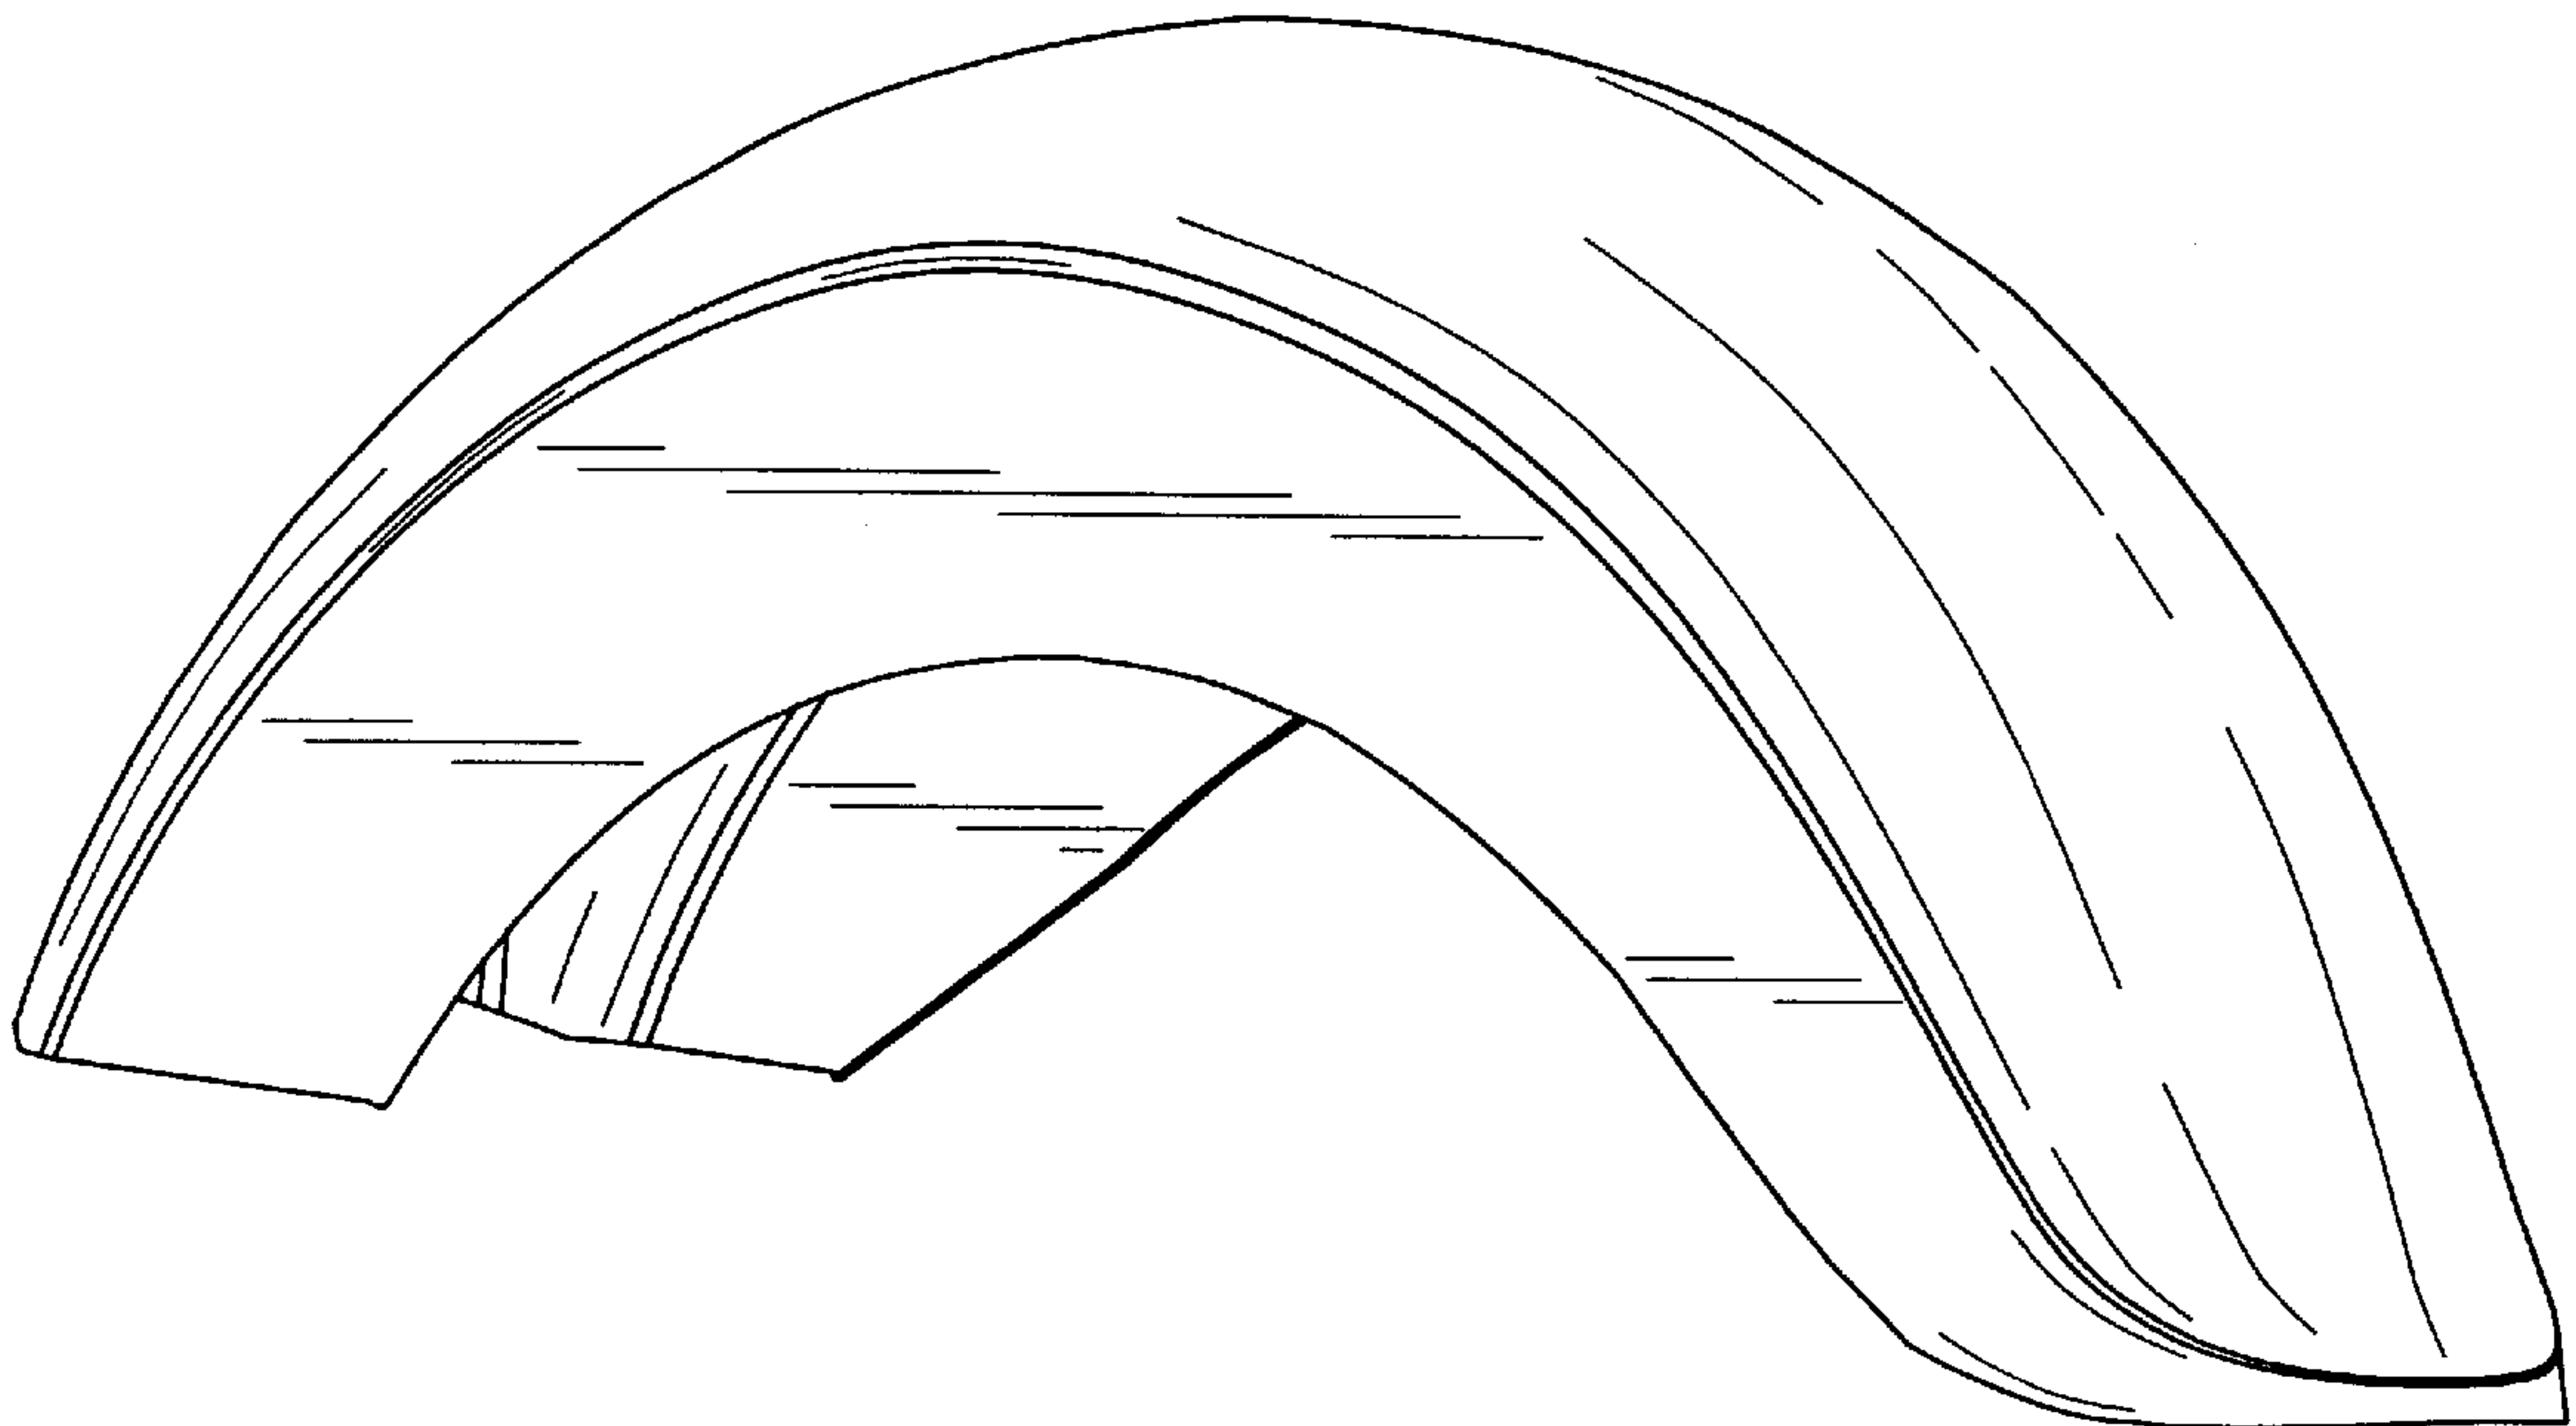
is a front right perspective view of the motorcycle fender of FIG. 1.
